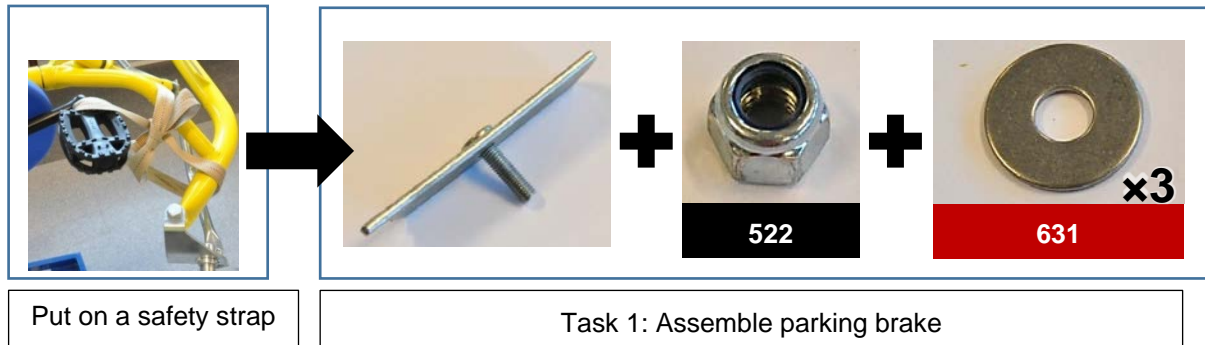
Assembly instructions used in the experiment, consisting of photographs
